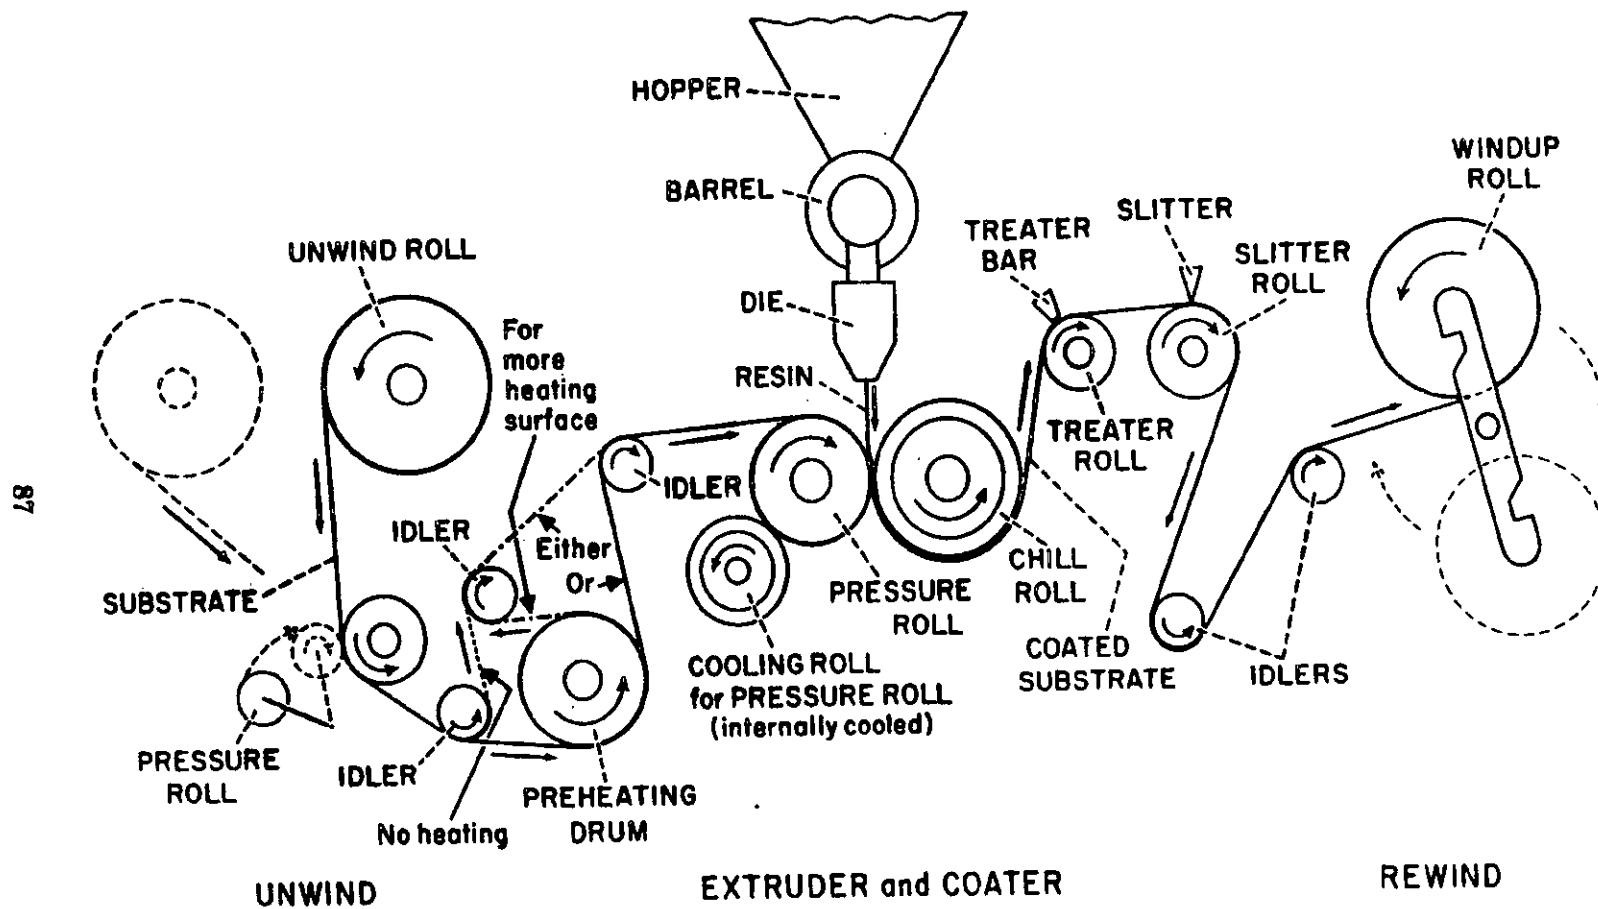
Schematic cross section through the entire extrusion coating set up, with unwind and rewind equipment.
